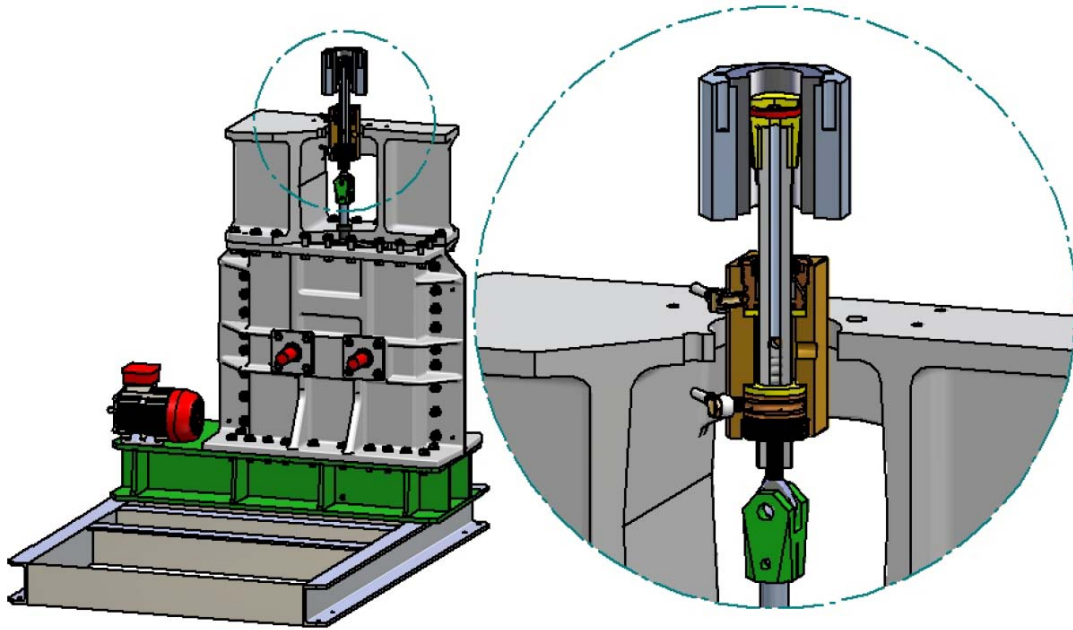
The test rig depicting foundation, electric motor, piston rod, piston and cylinder head. The work done by Schjelderup [23] focused on improving and redesigning an existing test rig and designing and constructing the device embracing the piston rod with the purpose of conducting pressurized water from a fundament fixed source to the surface between piston and cylinder liner. The leftmost image depicts the test rig and the rightmost shows an enlargement of the embracing device (From [23]).
